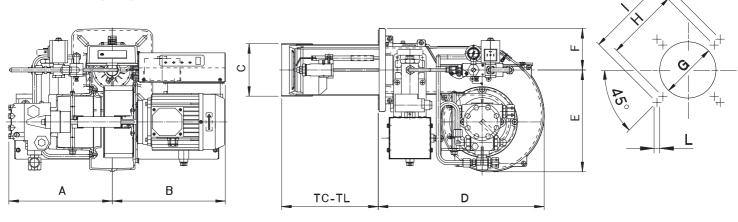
Dimensions FNDL 8 - FNDL 16 - FNDL 25
